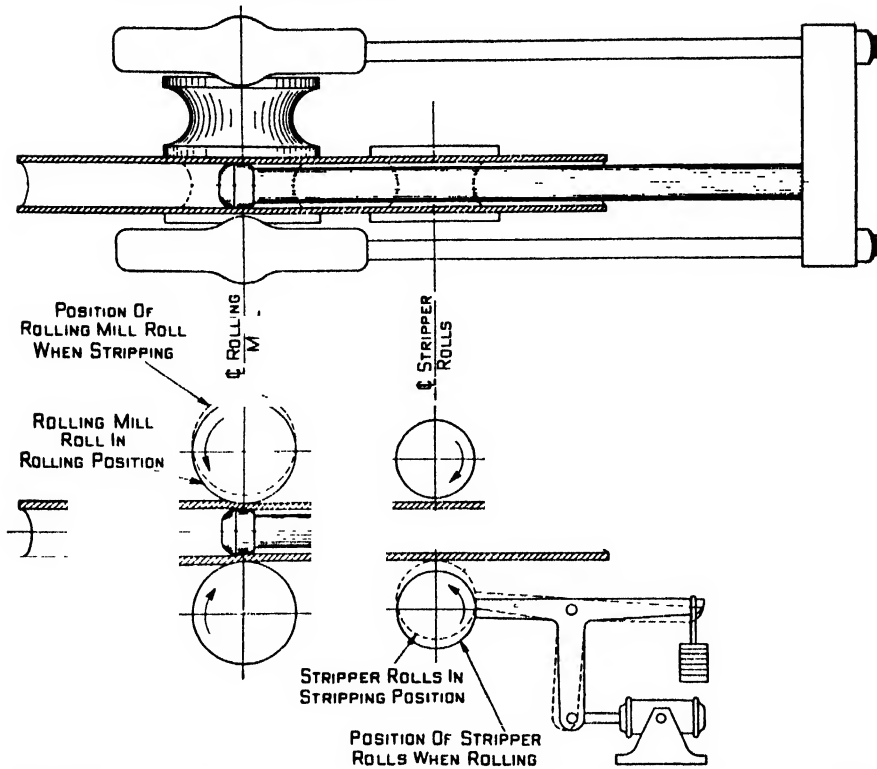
Schematic plan view (above) and elevation (below) of a plug rolling mill.
